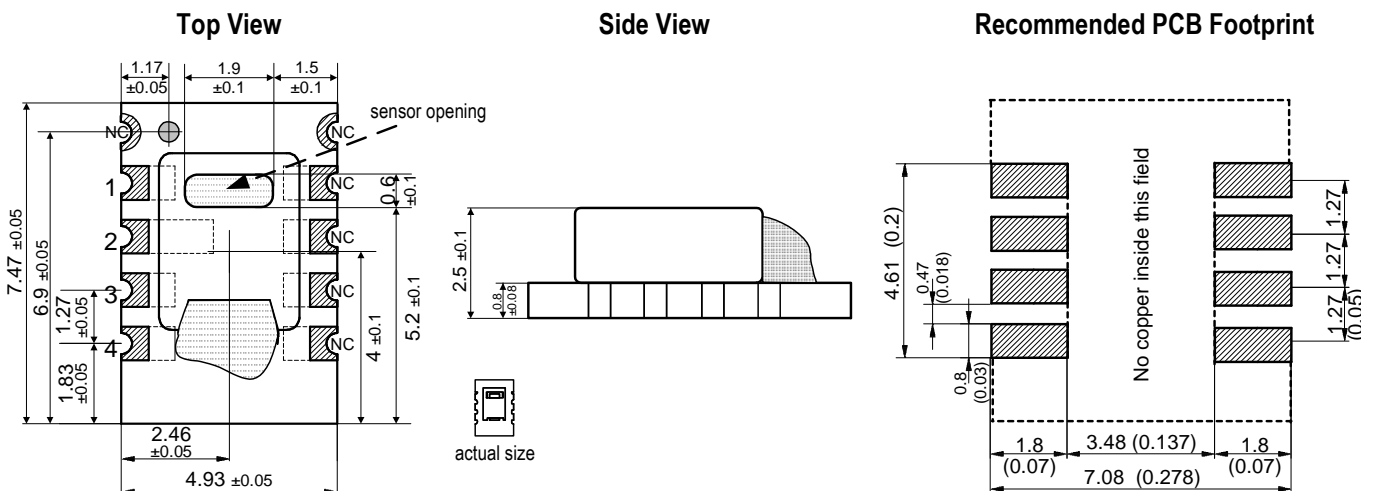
SHT1x drawing and footprint dimensions in mm (inch)
